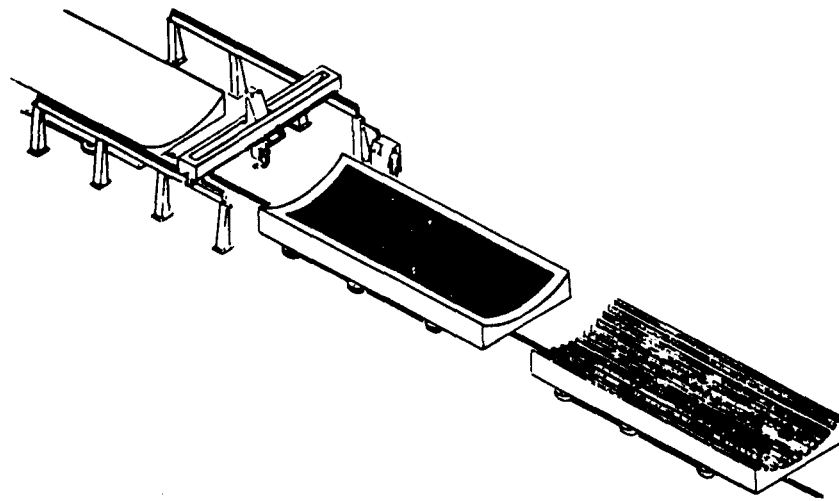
7-AXIS TAPE LAYING MACHINE
